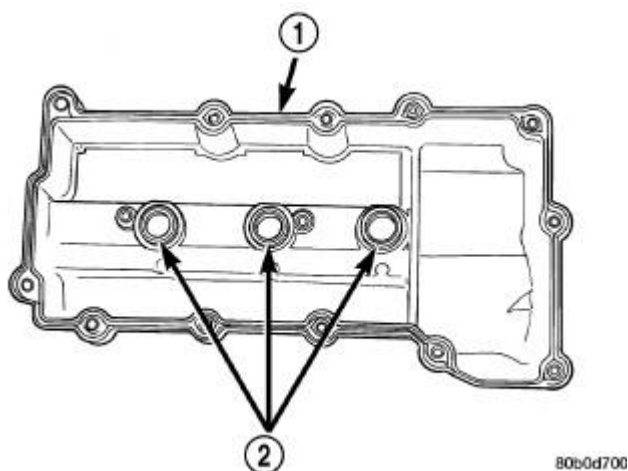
Cylinder Head Cover Gasket and Spark Plug Seals
